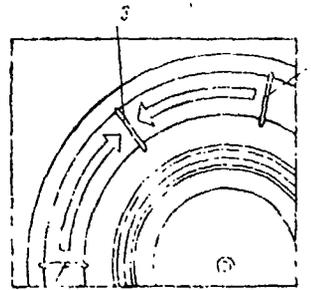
The position of the imbalance marks on the wheel (while it is being balanced)
